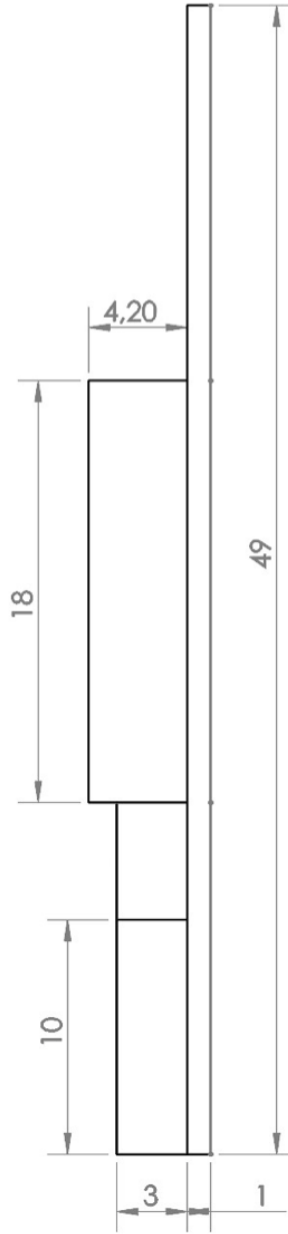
Side view of upper mould with 1.0 mm thickness (dimensions in millimetres).
